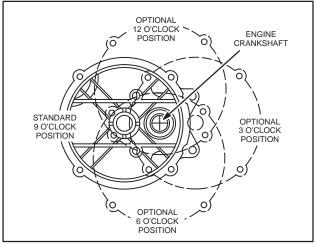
POSITIONING BEARING HOUSING ASSEMBLY
